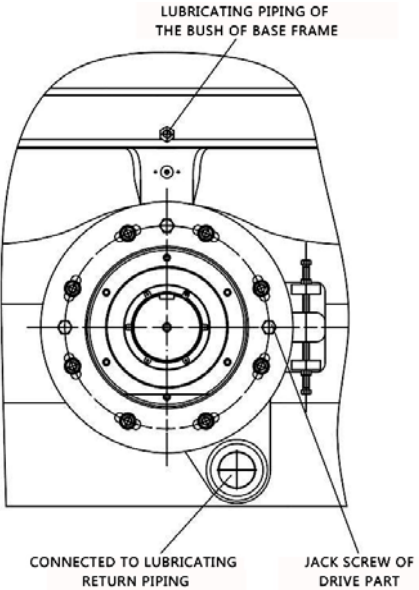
Schematic diagram of the inlets for the lubricating points of the bottom shell bushing
